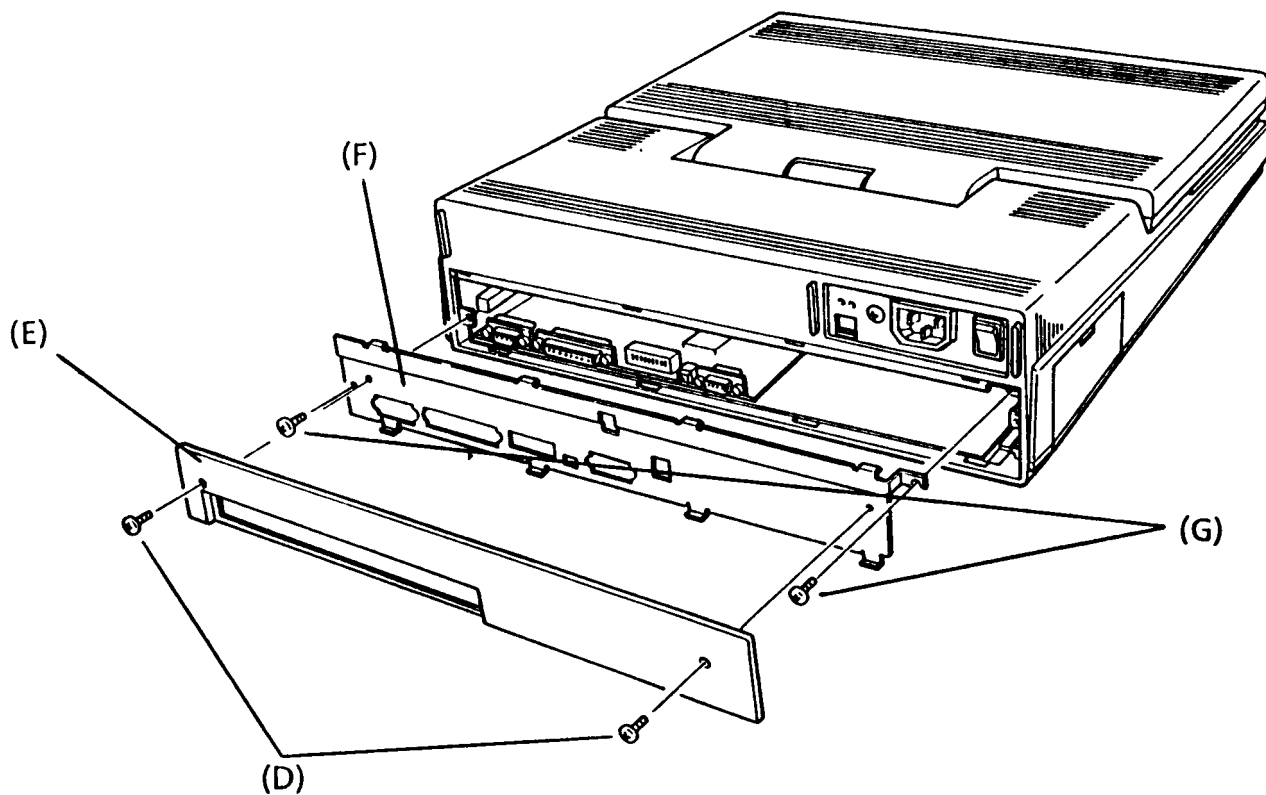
Removing the Rear Panel and Support Back Panel
